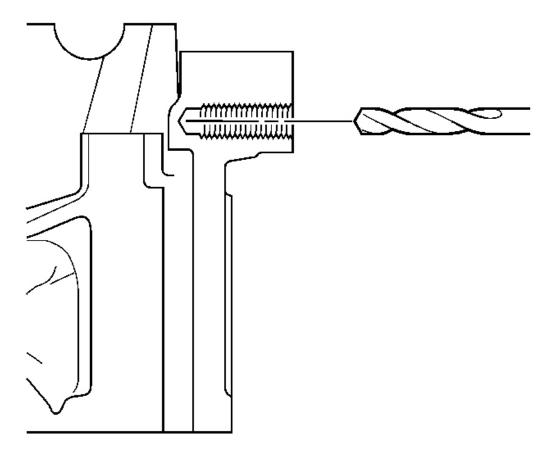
Drilled Hole Centerline Courtesy of GENERAL MOTORS CORP.
